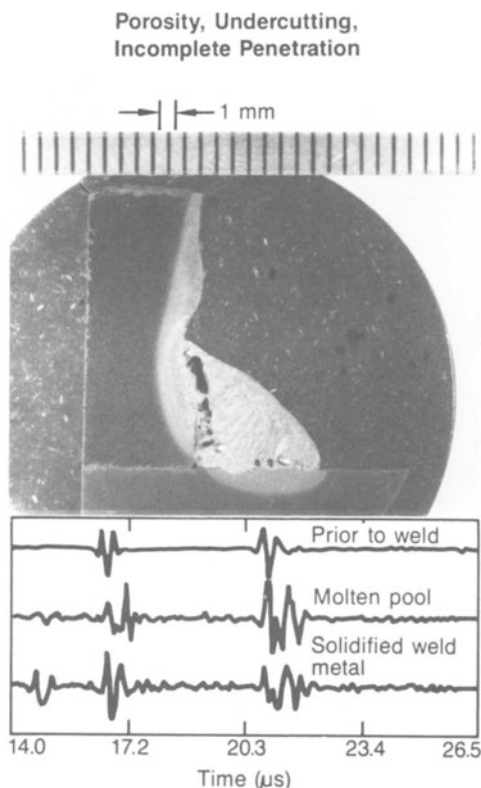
Polished and etched weld sample of porosity, undercut, and incomplete penetration with A scans acquired using a stationary transducer prior to welding, with molten pool, and of solidified weld metal.
